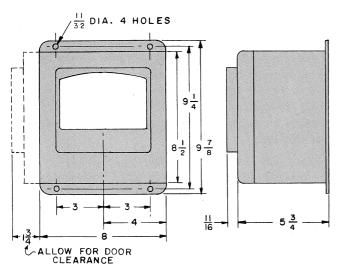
SURFACE MOUNTING DIMENSIONS
